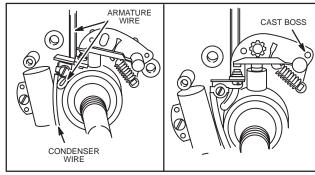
ADJUSTING STYLE I BREAKER POINTS
